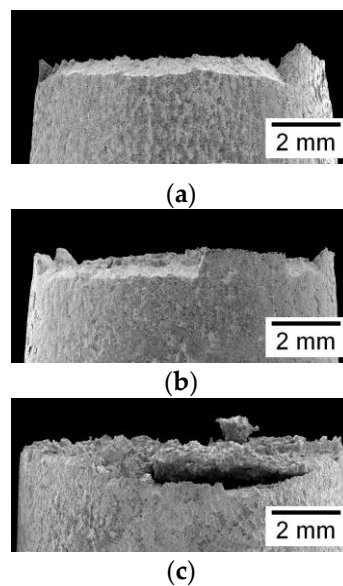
Side view of the fracture surfaces in the steels cooled using: (a) AC; (b) POF; (c) FCF.
